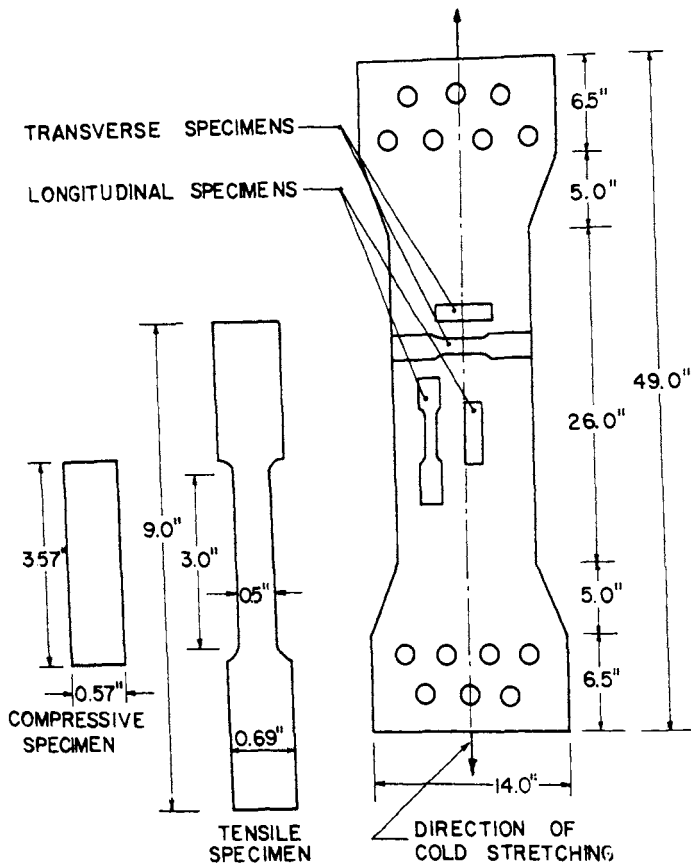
Plate used in cold stretching operation and typical tensile and compressive specimens.
